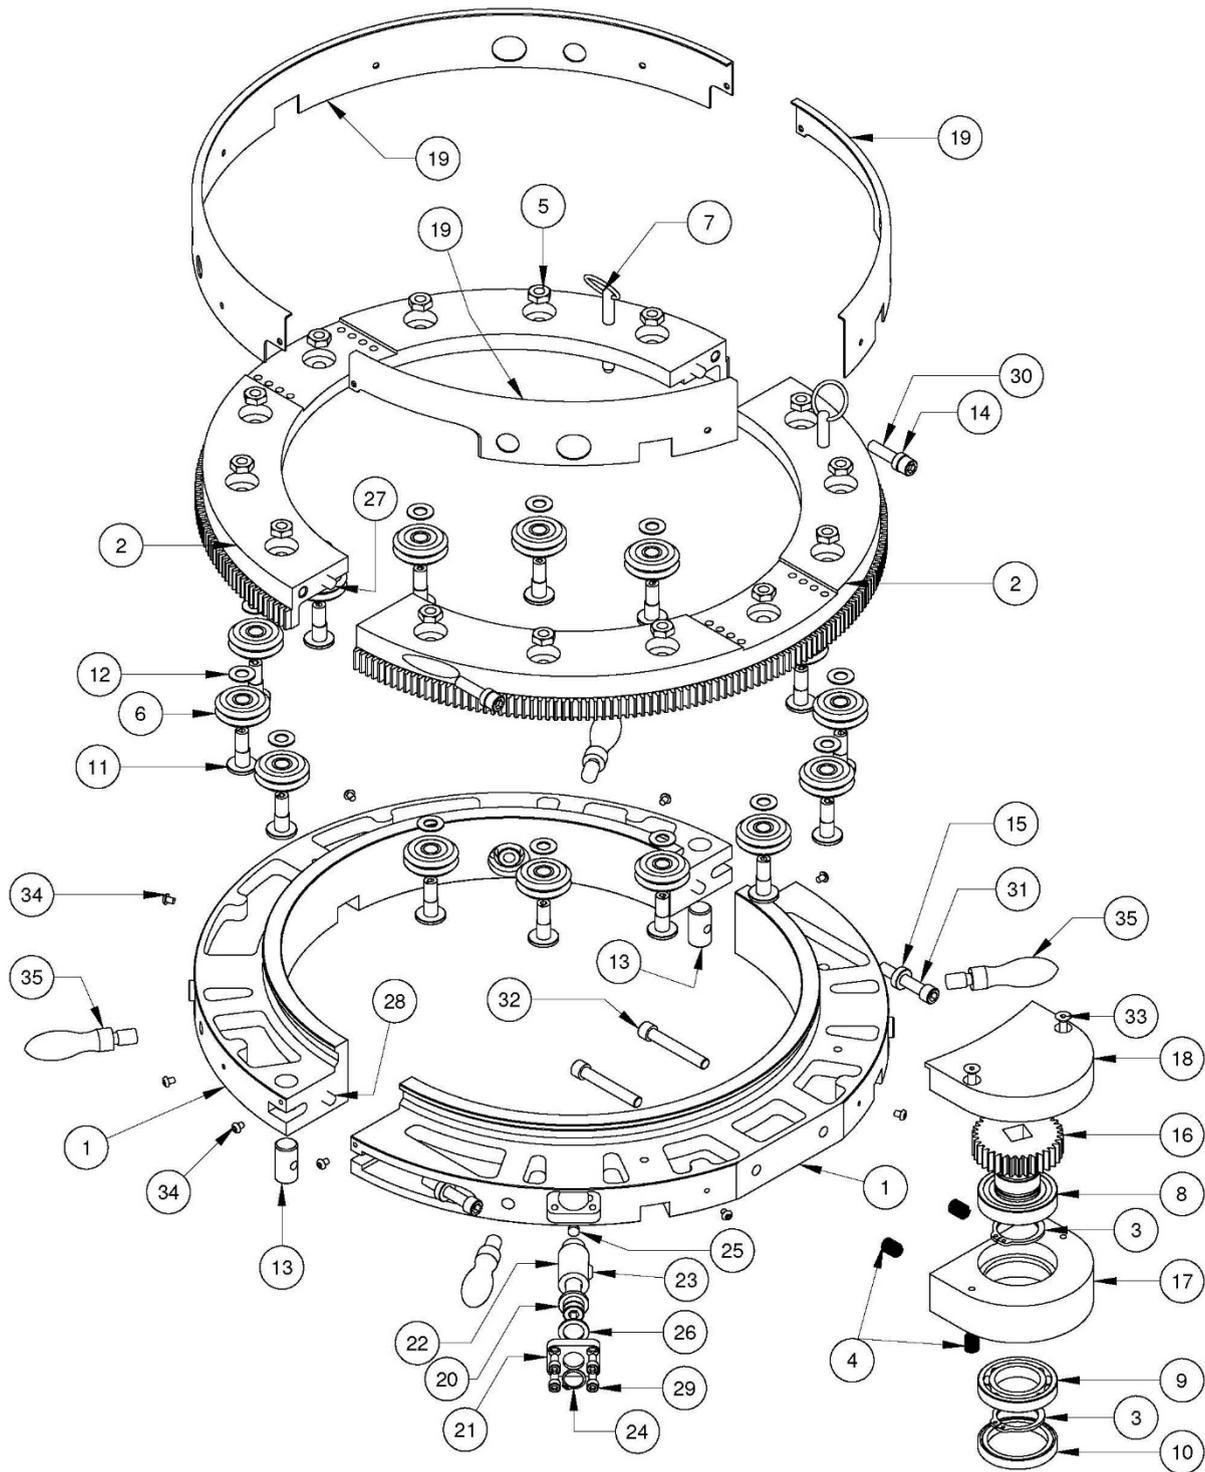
4''-62'' Steel Body Split Frame Assembly
